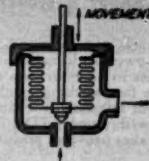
Packless Construction—Illustrating packless valve construction. Same principle used to seal stem movement or adjustment in many types of apparatus.
